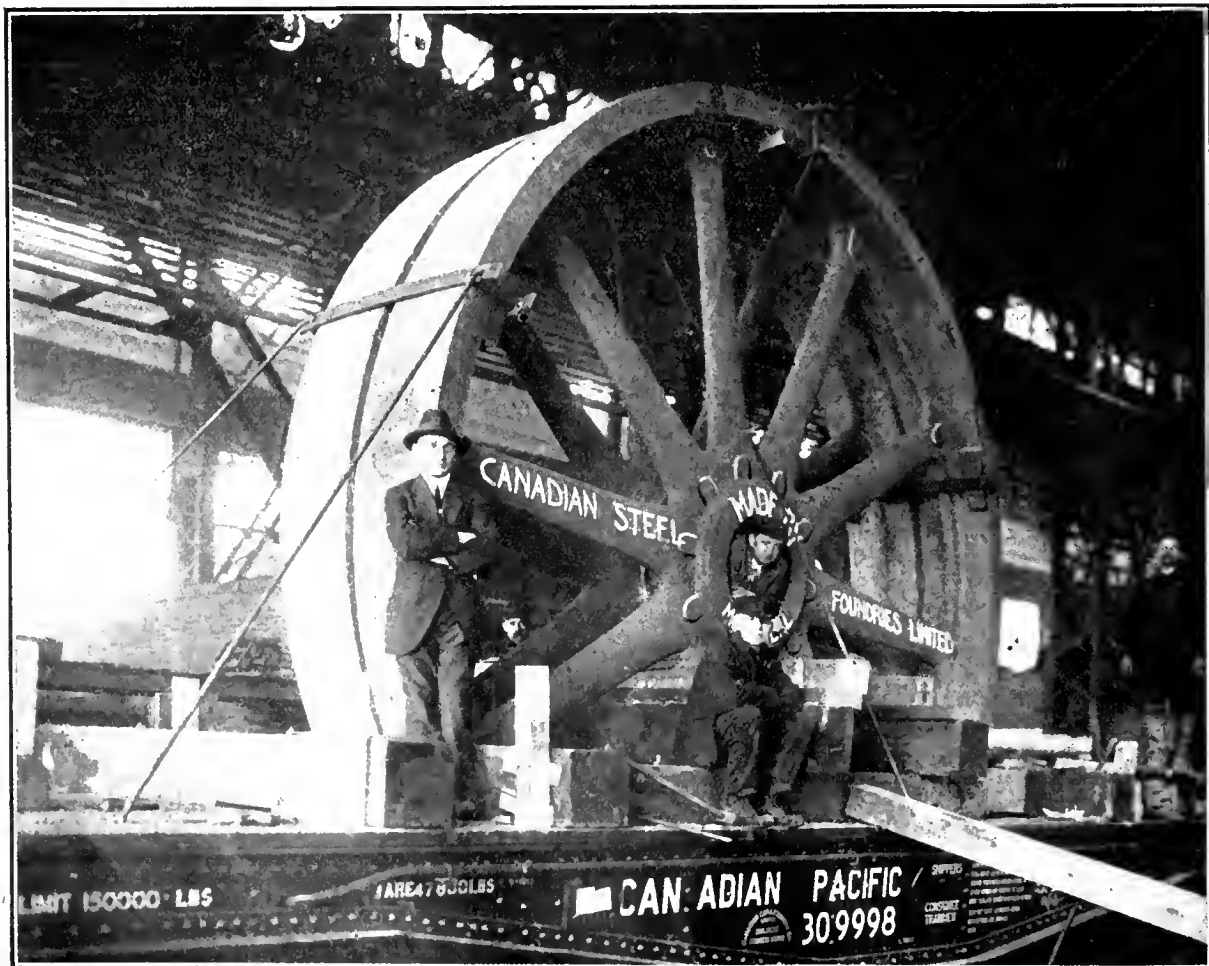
LARGE STEEL CASTING FOR ELECTRICAL MACHINERY. WEIGHT 10 TONS.
